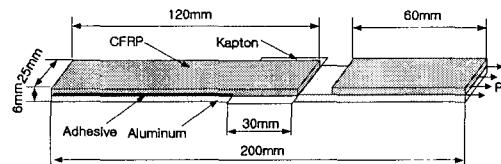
Configuration of aluminum/CFRP cracked lap shear specimen
